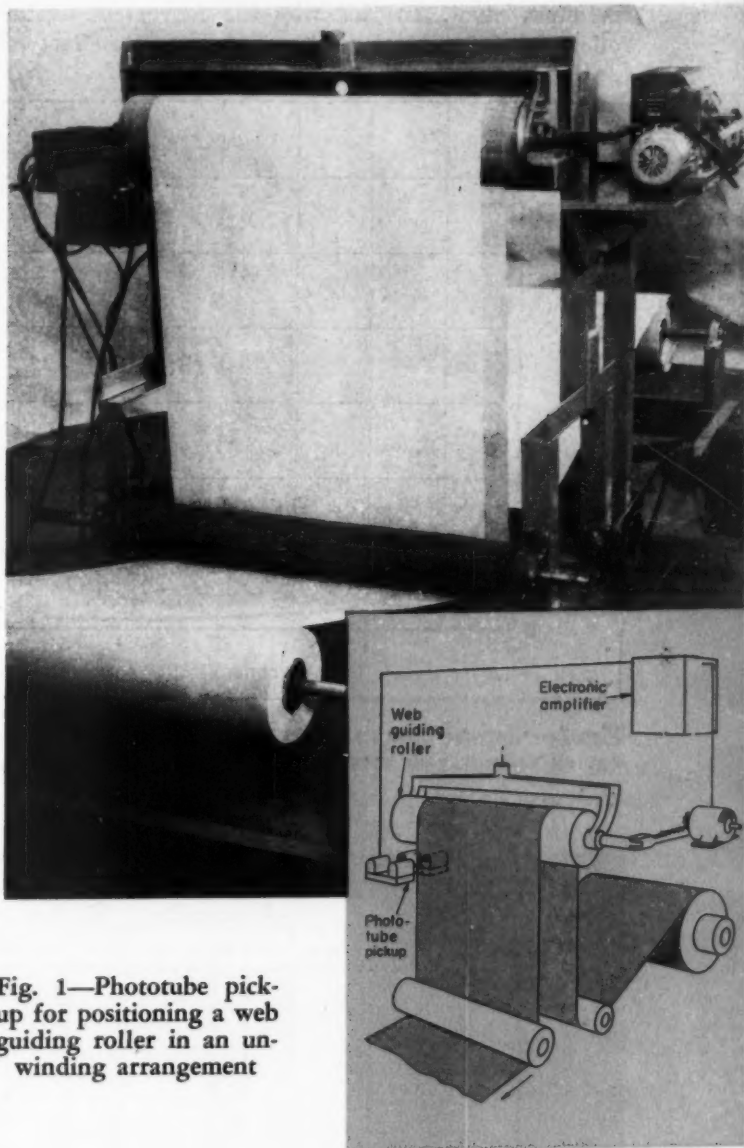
Phototube pickup for positioning a web guiding roller in an unwinding arrangement
